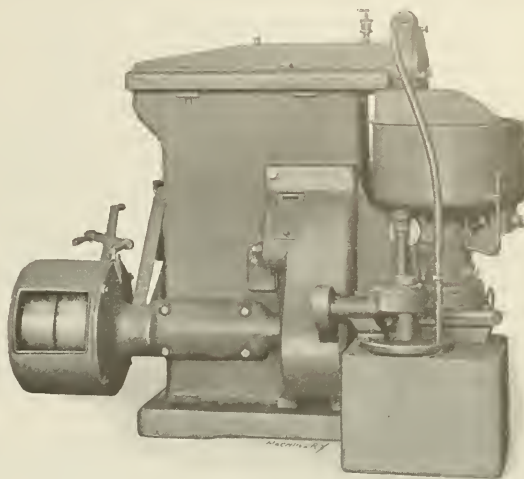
Opposite Side of Heald Rotary Surface Grinder shown in Fig. 1
